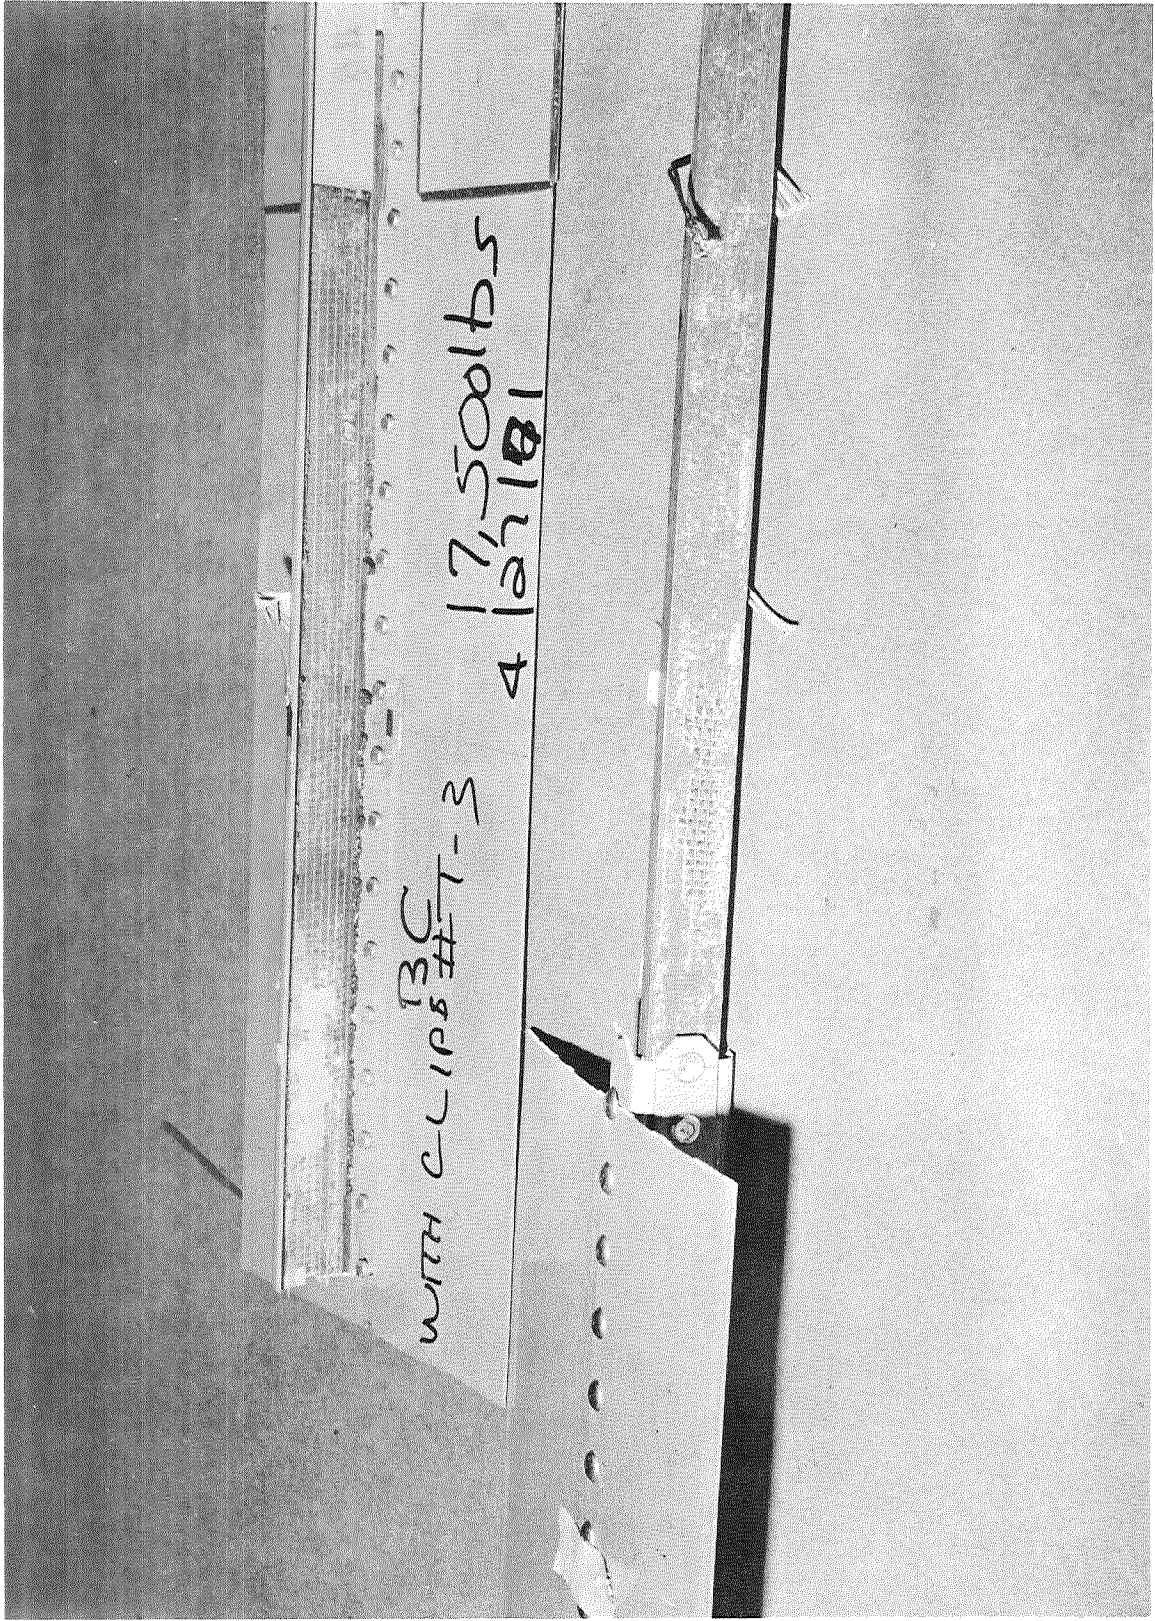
TENSILE FAILURE IN REINFORCED STRINGER SPECIMEN.
